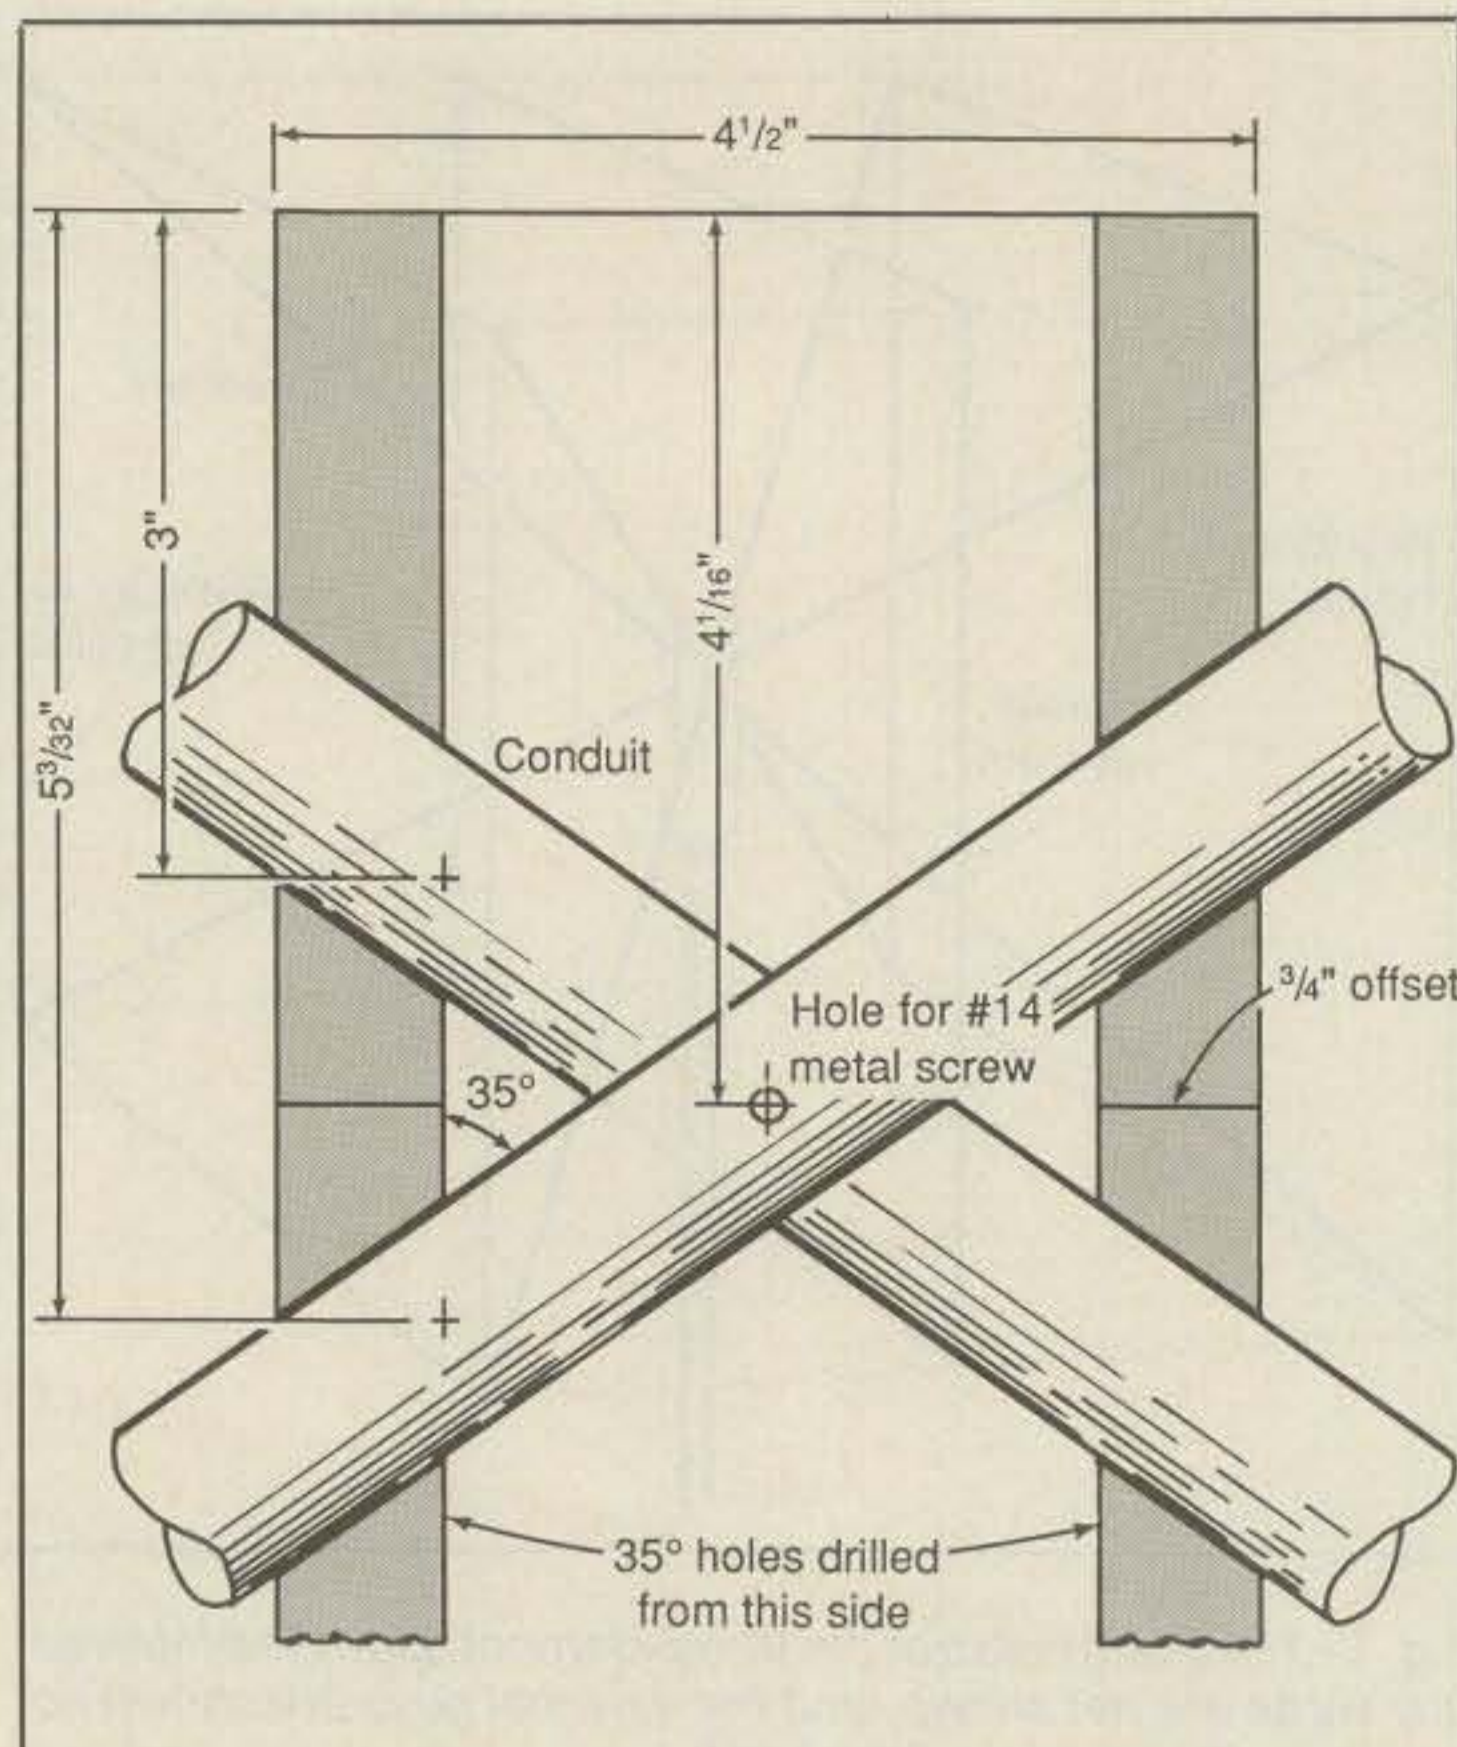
A jig to aid in the drilling of the conduit holes in the center support pieces.
